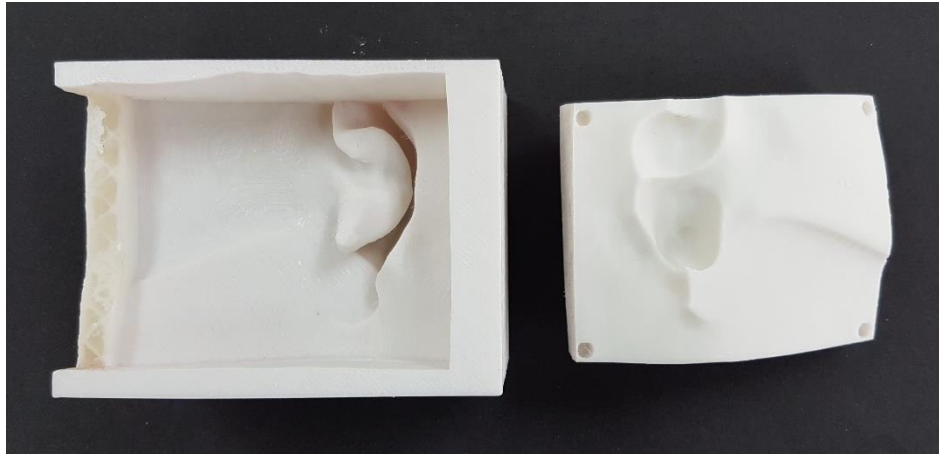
Injectable silicone mould for fabrication of elastic skin layer
